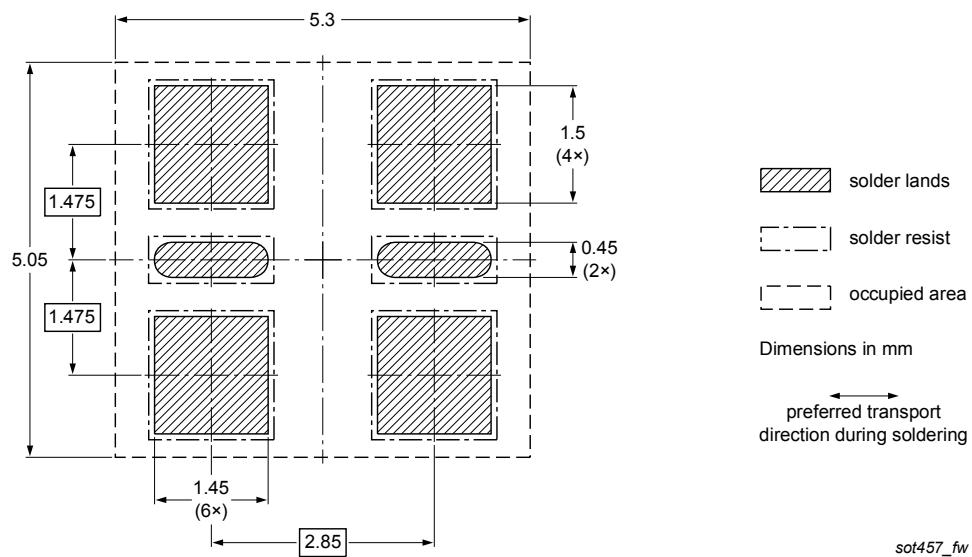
Wave soldering footprint for TSOP6 (SOT457)
